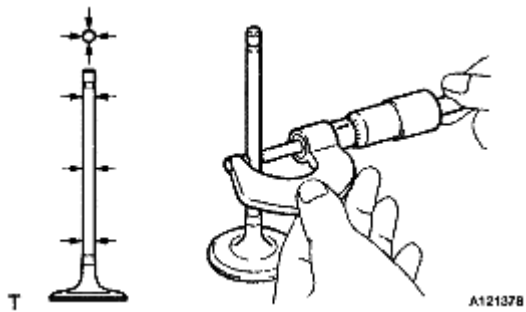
Measuring Diameter Of Valve Stem Using Micrometer
